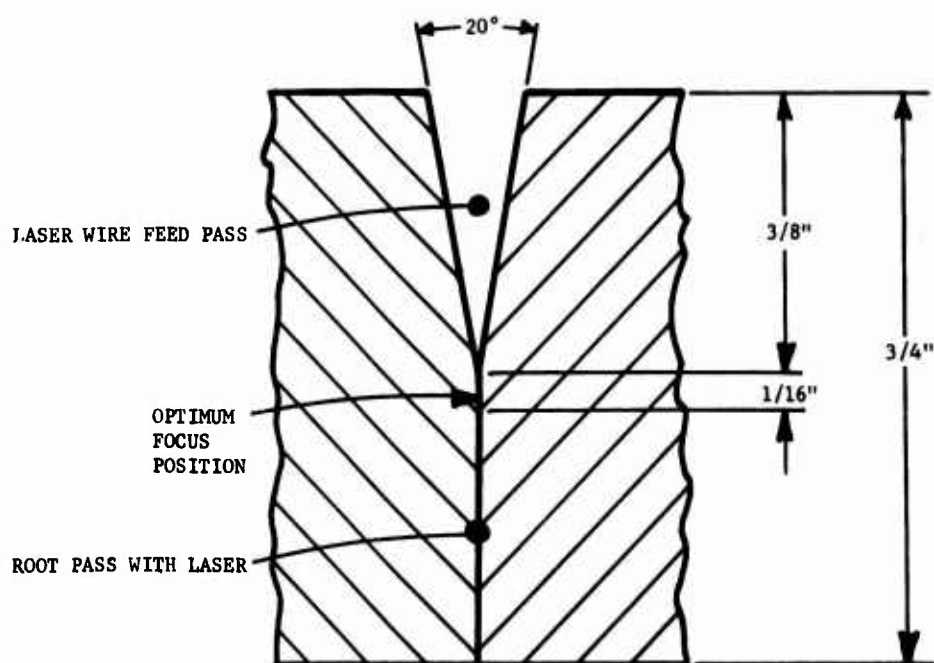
JOINT CONFIGURATION FOR WELDS IN HEAVY MATERIAL
